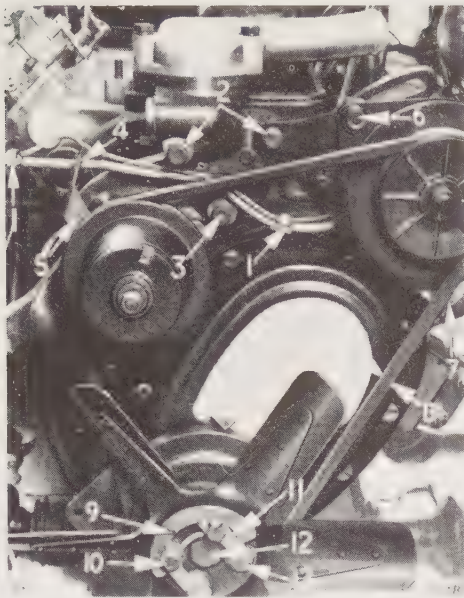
3 Water pump and generator drive and associated parts, on 6-cylinder engine.
